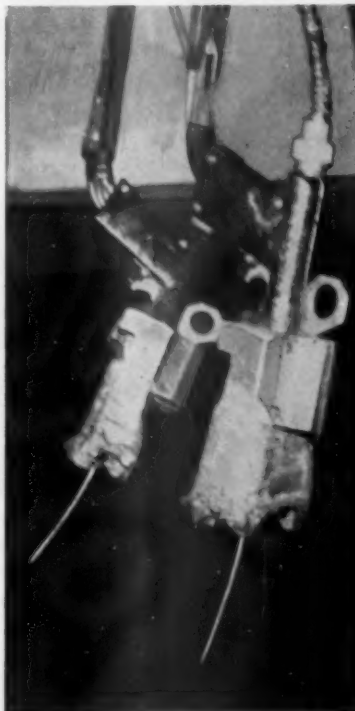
Gun-type welding units with inert gas tubes and electrical leads attached. Welding electrodes are pulled out extra length for display purposes. (Courtesy Cadillac Motor Car Division, General Motors Corp.)
